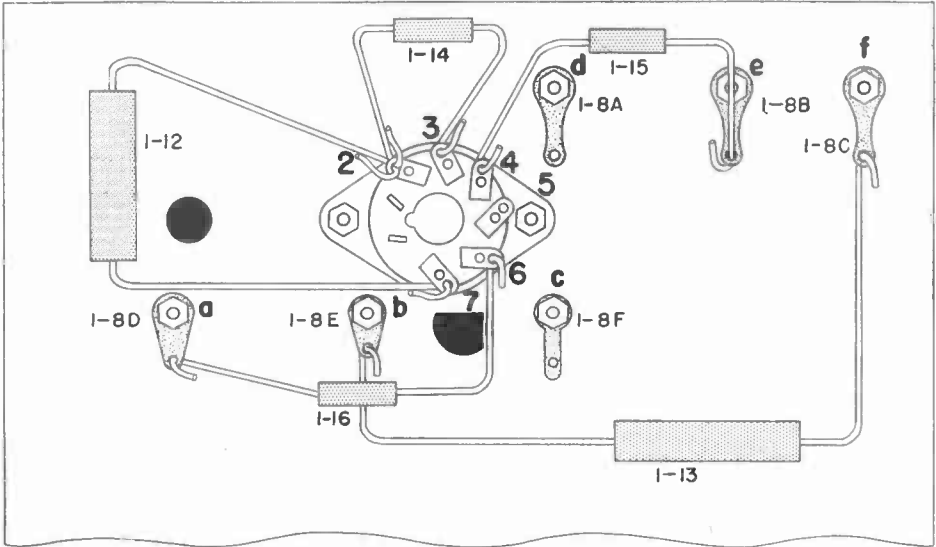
The five radio parts which you connect to lugs in Experiment 9 are shown here ready for soldering. If you prefer, you can prepare all the parts in this manner, and then solder all the joints at once instead of soldering each part separately as called for in the experiment. WARNING: Bends in resistor and condenser leads should be *gradual* (not sharp), and should begin at least one-quarter inch away from the body of the part; otherwise, the leads will break off.
